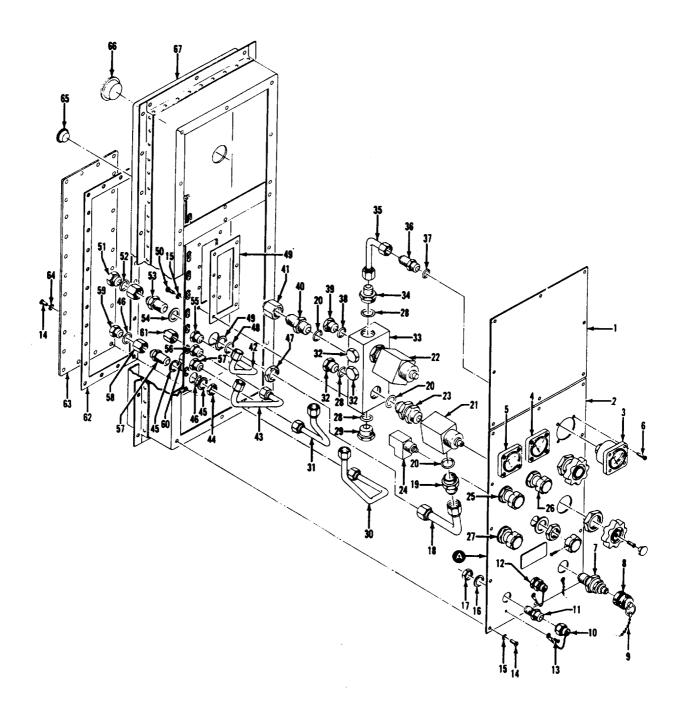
GOX Module Assembly (Sheet 1 of 4)
